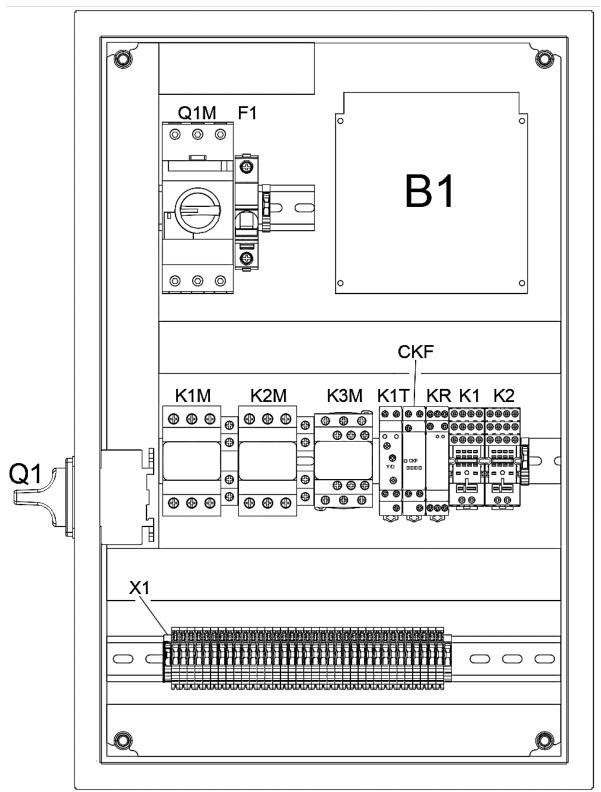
Electrical switchgear facade for equipment type UFO-A-N
